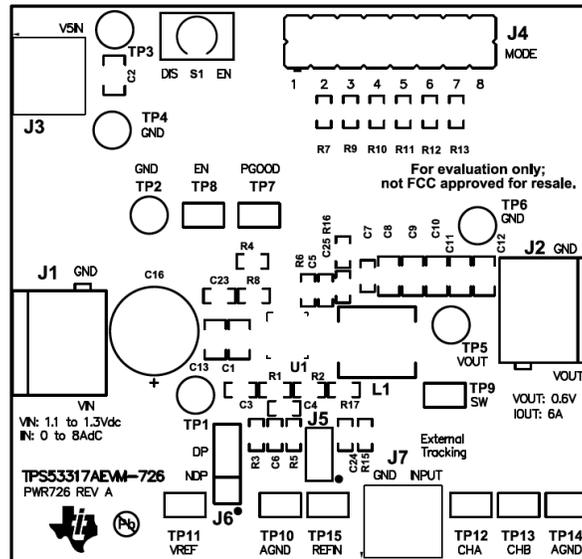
TPS53317AEVM-726 Top Layer Assembly Drawing (Top View)
